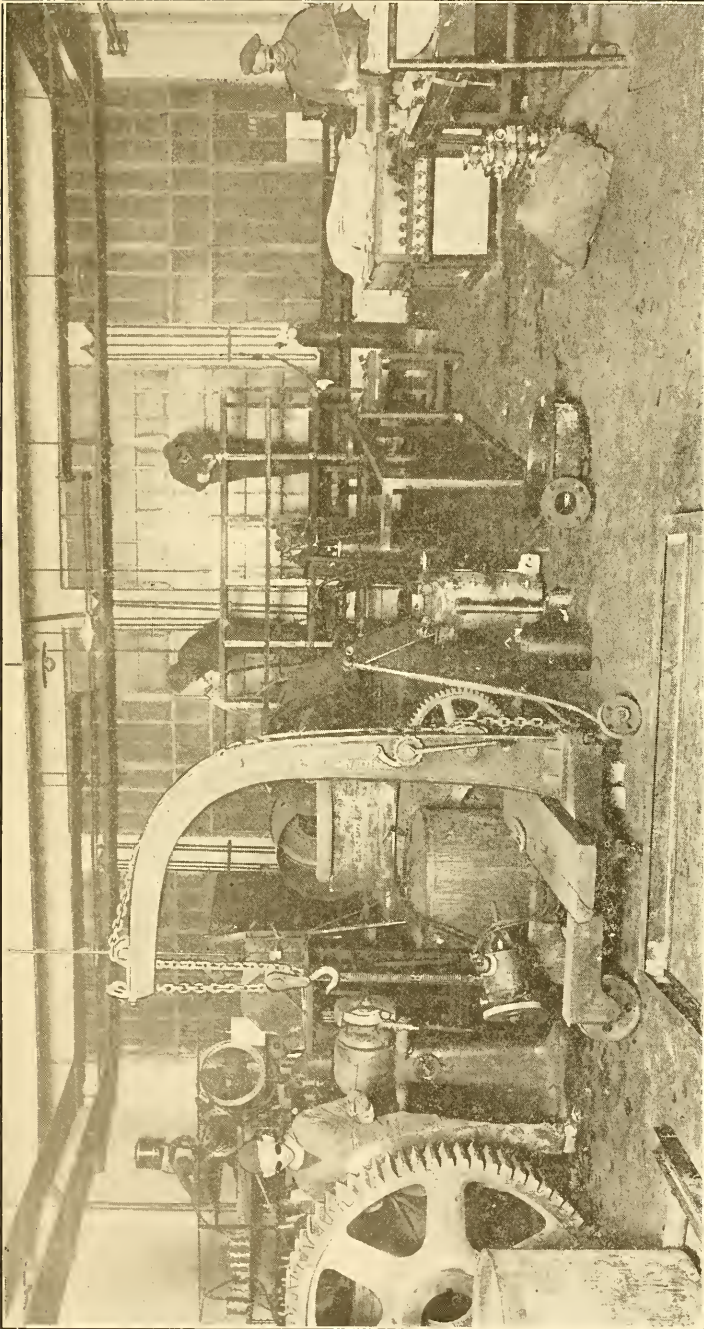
Interior View Showing Portable Crane and other Equipment.
